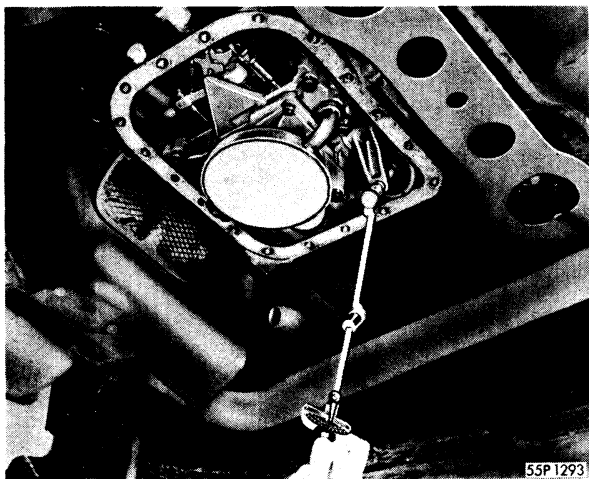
Adjusting Reverse Band, Using Wrench (Tool C-3380)
